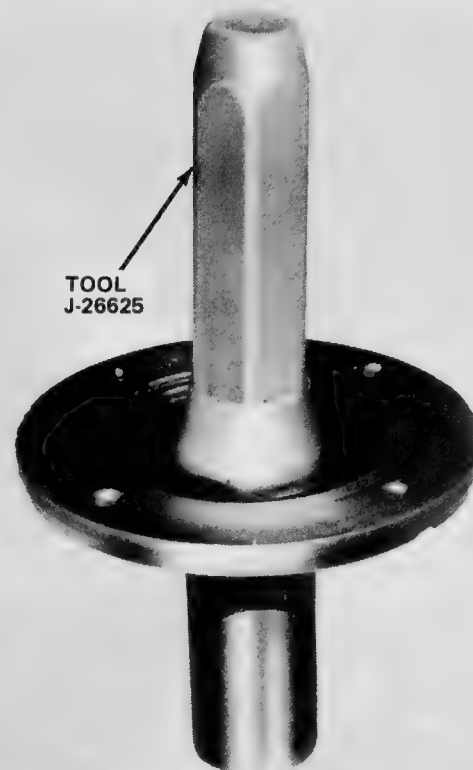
B-41 Front Bearing Cap Oil Seal Installation
